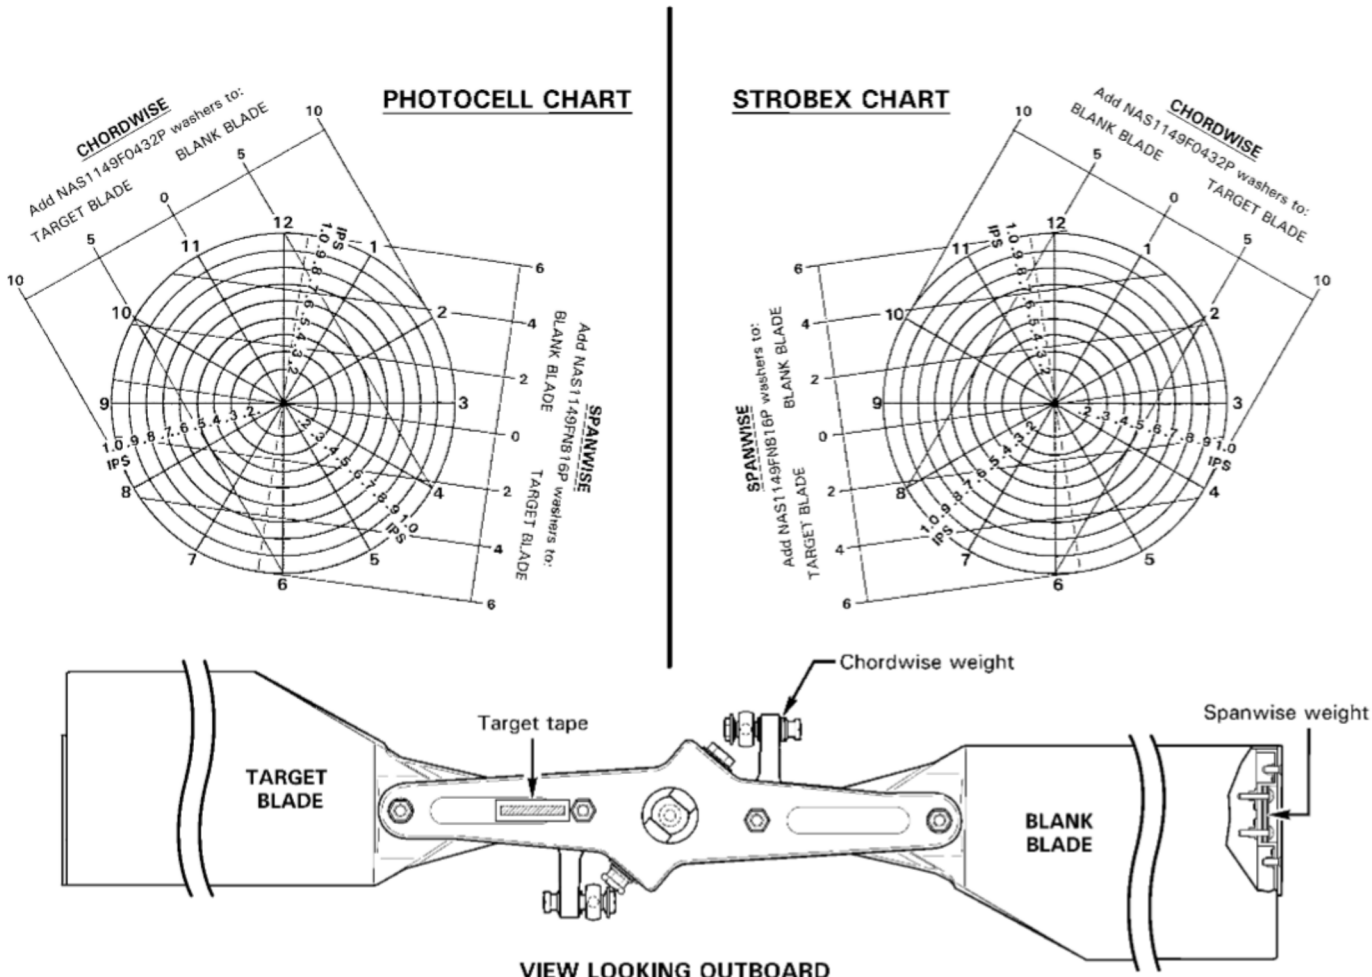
C008-4 TAIL ROTOR ASSEMBLY DYNAMIC BALANCE CHART
